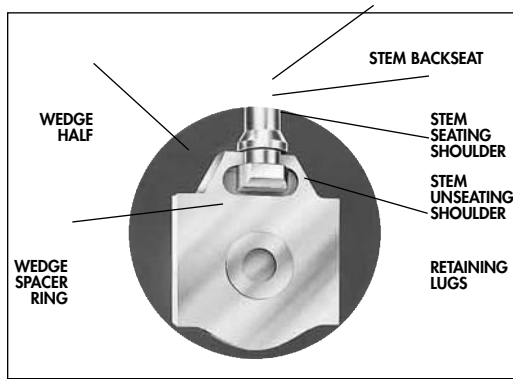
Cutaway of Equiwedge Two-Piece Wedge.
